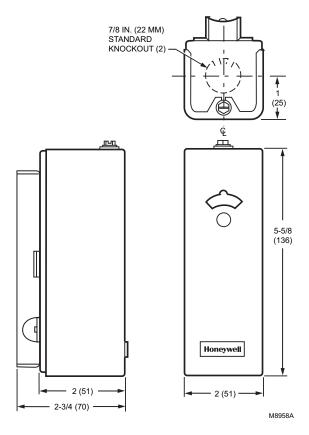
Approximate installation dimensions in inches (mm) for surface mount models.
